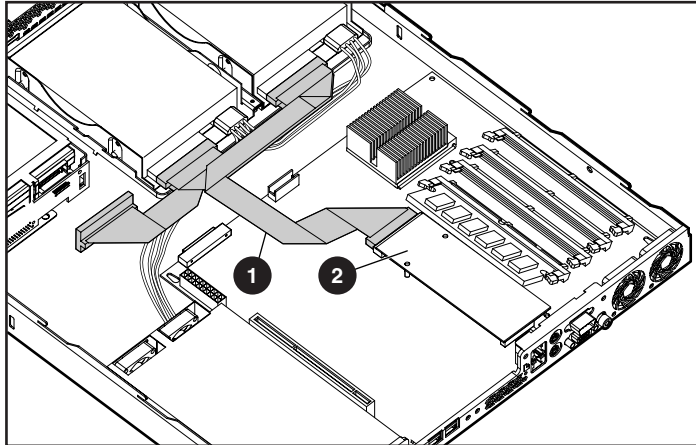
SCSI cable connected properly to the SCSI module on the system board (center wall and PCI riser board assembly removed for clarity)
